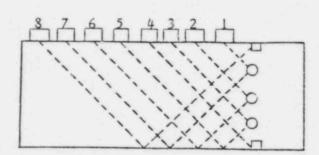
ULTRASONIC CALIBRATION STANDARD SNPS-4 FOR CLOSURE HEAD WELDS
